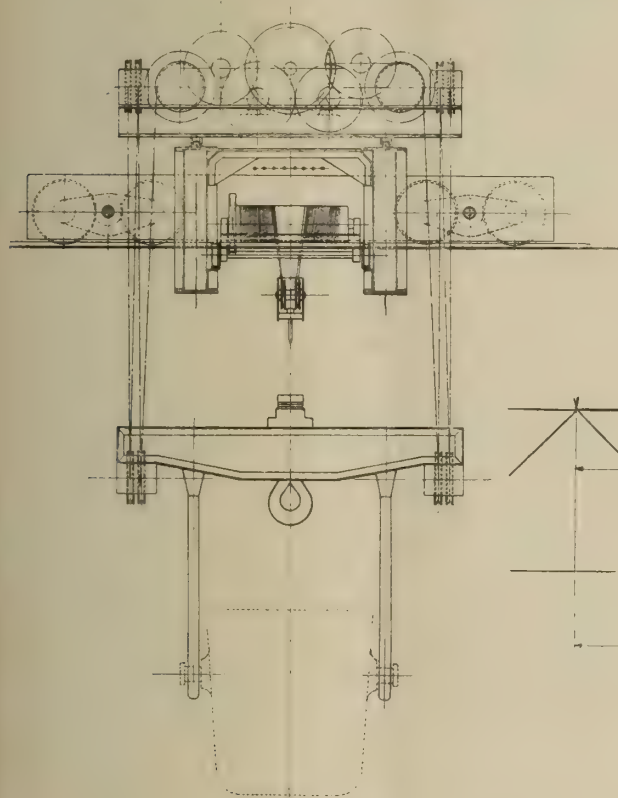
DESIGN AND EQUIPMENT OF CRANES.
